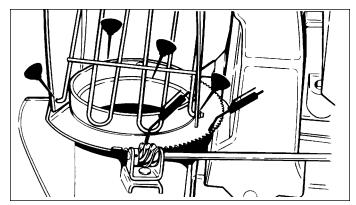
Lubricate Points Where Chute Contacts Flange (oil); Lubricate Ring Gear and Pinion Gear While Rotating Spout (grease)
